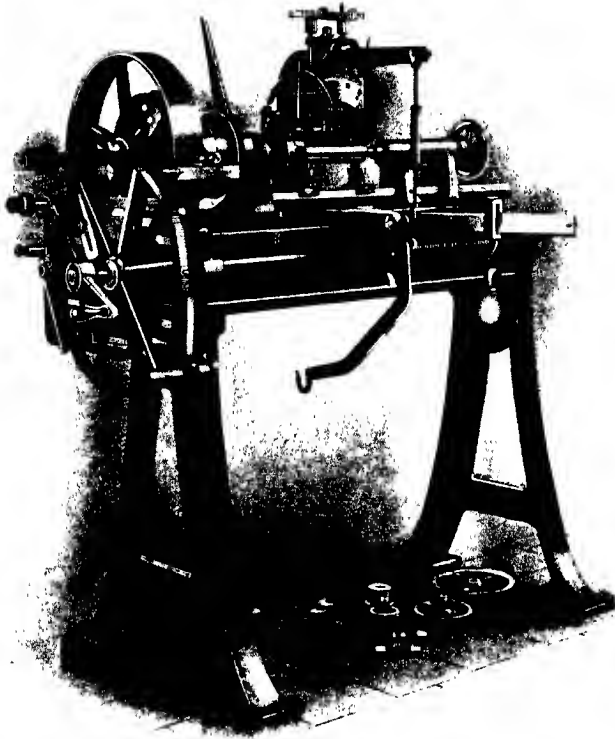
Re-pressing or Dividing Machine for Dies.
